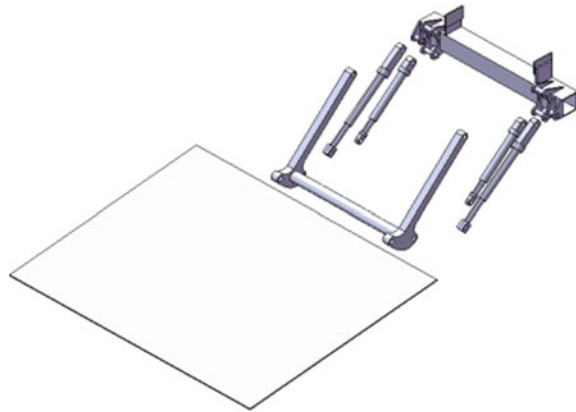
The assembly model of tail-lift in exploded view of SolidWorks
